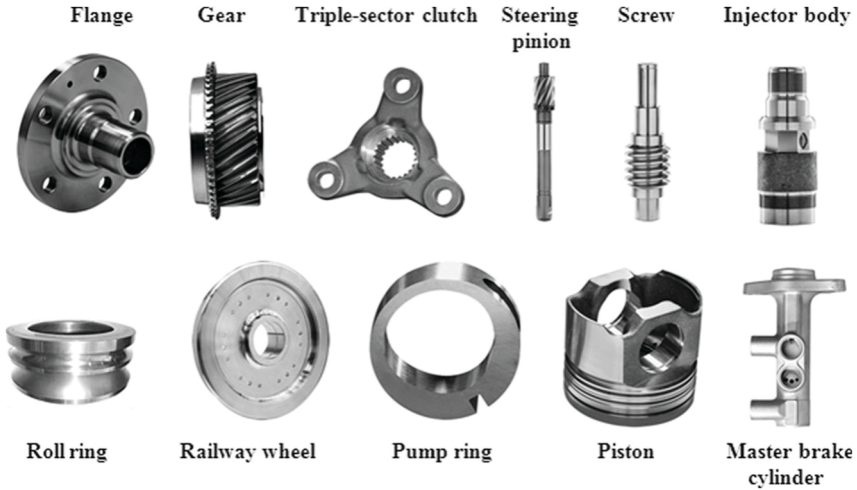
Industrial applications of hard-part machining. (From Ref. [5].)
